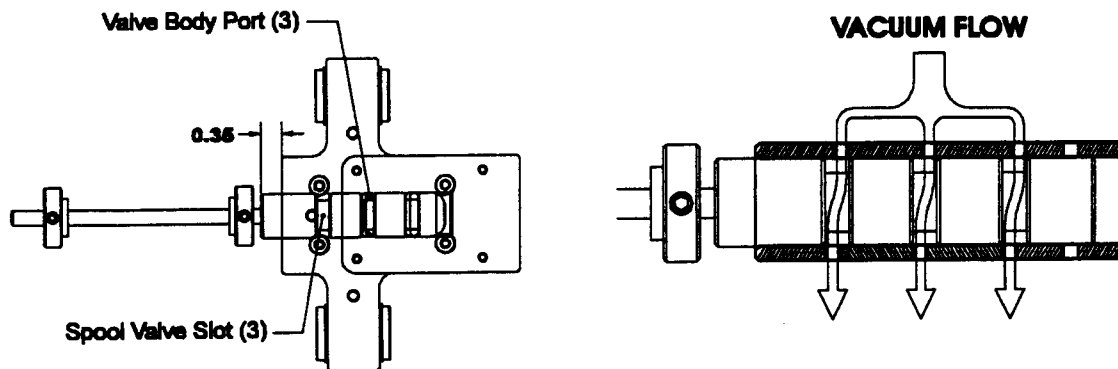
Feeder vacuum valve assembly illustrating the location of the spool assembly when the shuttle feed plate has attained its fully back position. Side view shows vacuum flow from the top to the lower valve body port when spool valve slots are properly centered along the ports. End port shown is the vent port which is completely blocked by the spool.
